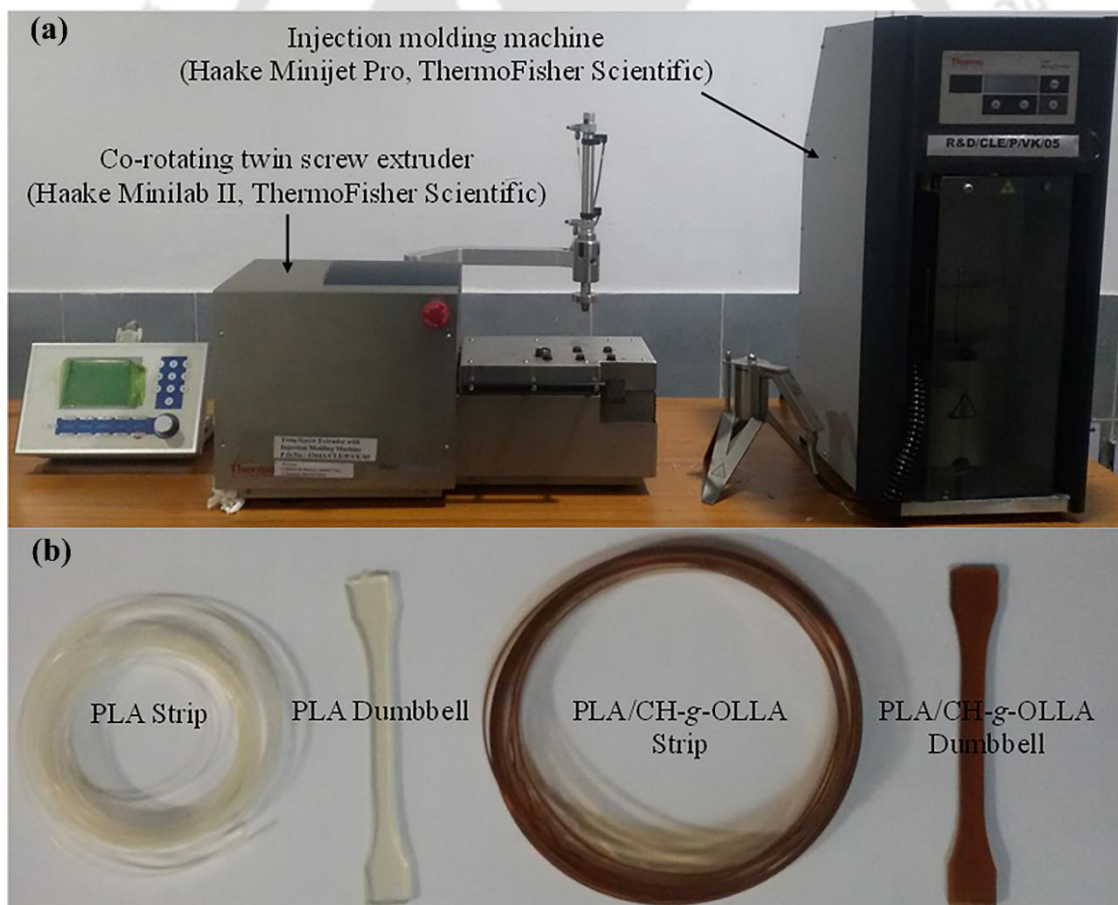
(a) Co-rotating twin screw extruder and injection molding machine and (b) Fabricated PLA strip, PLA dumbbell, PLA/CH-g-OLLA strip and PLA/CH-g-OLLA dumbbell.
